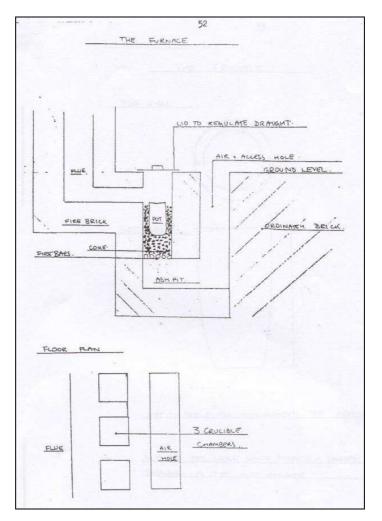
Section through a single foundry furnace, and the complete installation of three such furnaces at Bewdley foundry (Day 1992, 52)
